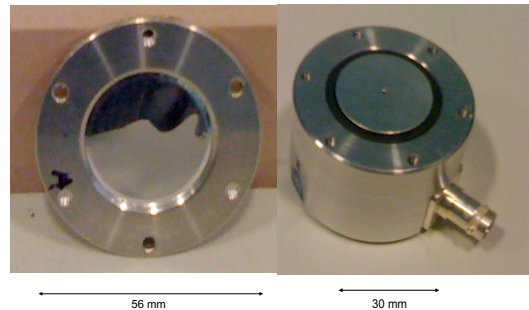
Picture of Kapton Film Bonded on a Metallic Ring (Left) and Backplate Produced using MSL Technique on a Final Assembly Without Membrane (Right)
